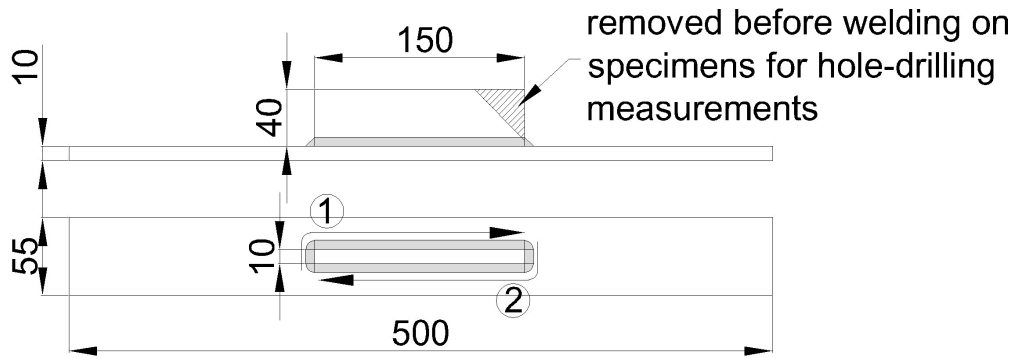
Longitudinal stiffener specimens, welding sequence indicated by ① and ②.
